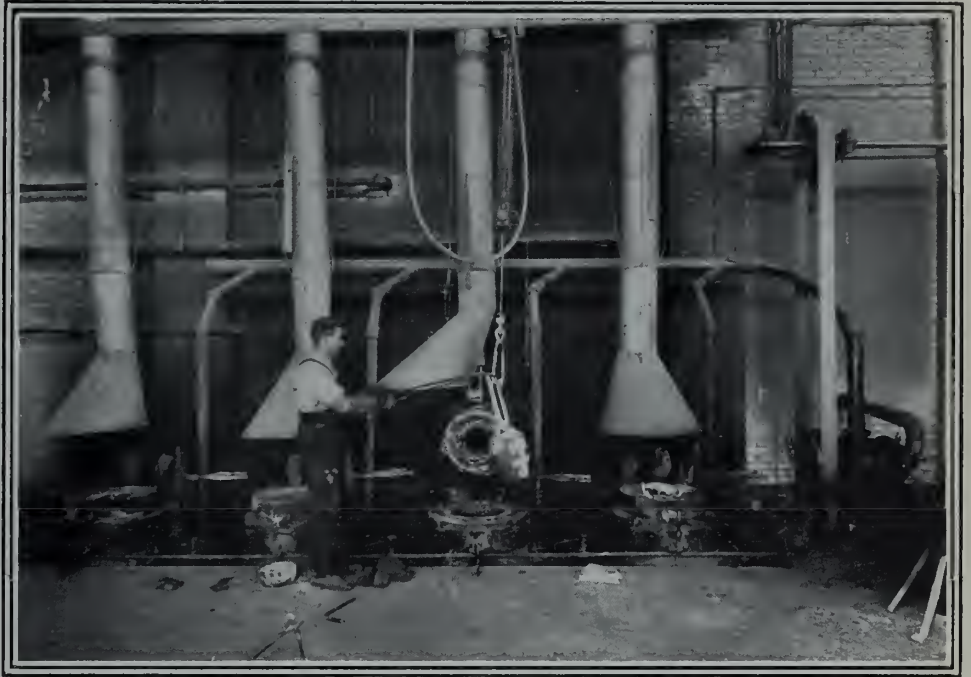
View Showing Oil Furnaces, Which are of the Most Up-to-date Pattern. The Crucible is being taken from the Furnace by Automatic Compressed Air Crane.
